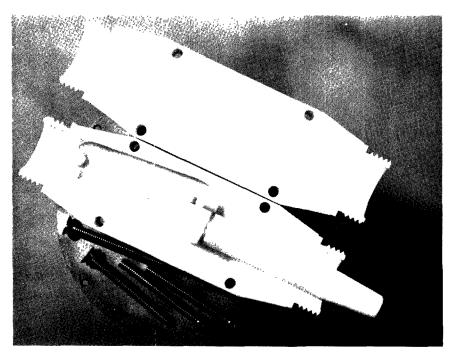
Close-Up Showing Machined Chamber with Pickup for Bleed-In in Place.
